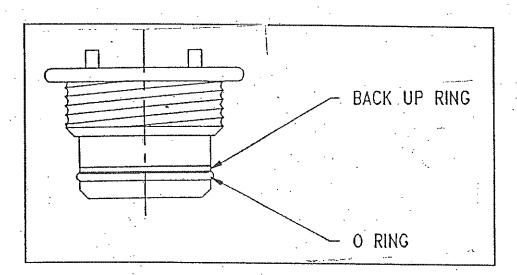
TOP PLUG "O"-RING AND THREAD LUBRICATION
